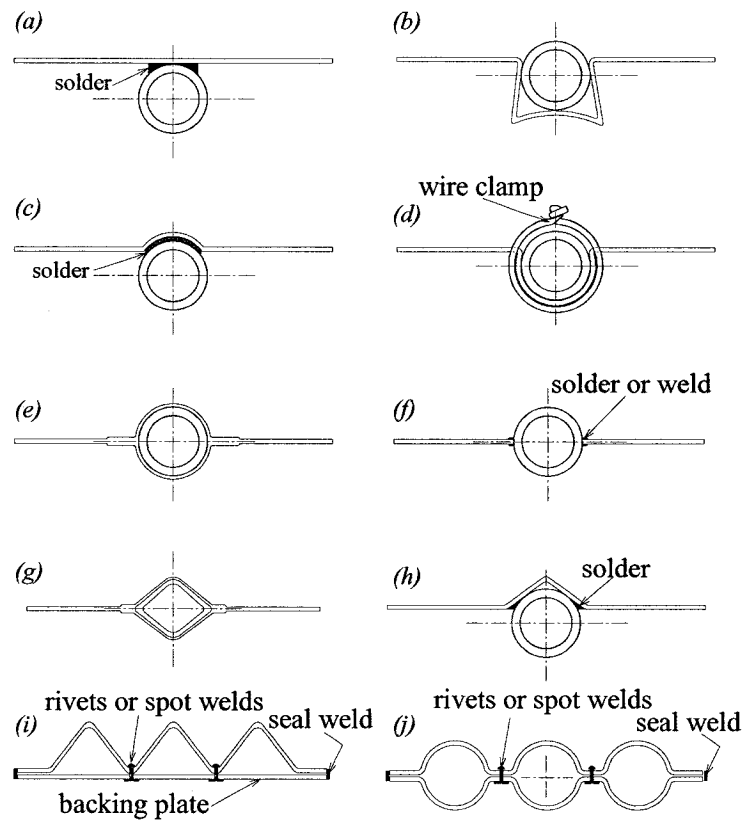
Different Designs of the Absorber Plate: (a) plate above tube with soldered bond; (b) self-clamping plate; (c) round profiled plate with soldered bond; (d) metallic wire clamped plate; (e) mechanically bonded plate around round tube; (f) soldered or HF welded fins to the pipe; (g) mechanically bonded fins around diamond shaped tube; (h) triangular profiled plate with soldered bond; (i) sandwich design with corrugated plate; (j) round rolled plates.
